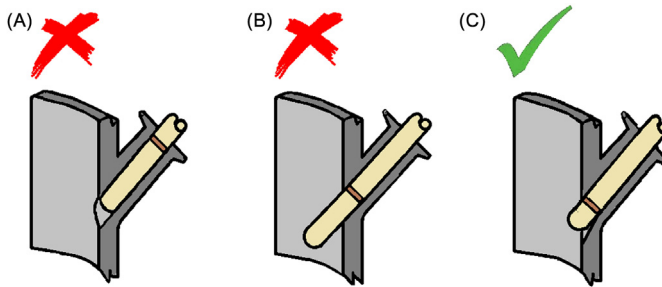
Probes shall be inserted in sloped, welded-in side ports, the weld being polished to obtain a surface finish comparable to that of the original finished metal. (A) An elastomeric seal at the entrance of the port (end opposite to the tank wall) gives rise to an uncleanable long and large crevice between the interior surface of the sensor port and the outside probe surface. (B) Protrusion of probes in a vessel wall should be avoided, as they may form a shadow area during cleaning. (C) When the elastomeric O-ring seal is placed close to the vessel wall, only a short crevice is formed.
